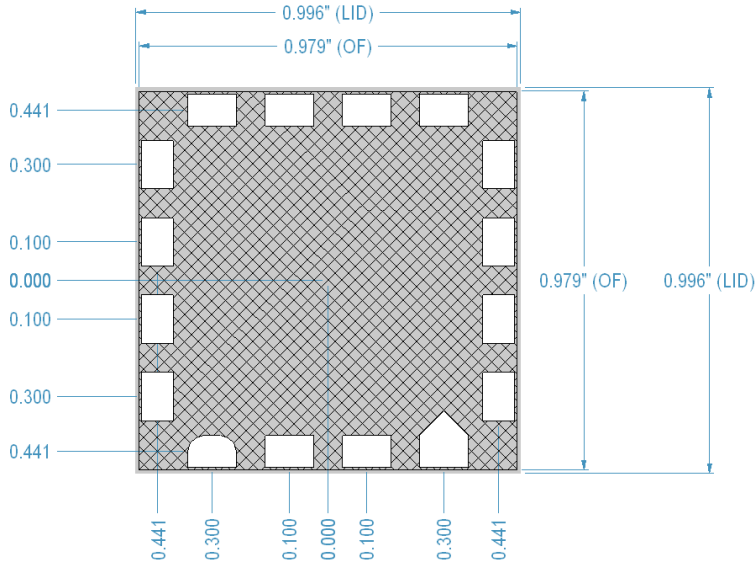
Open-frame Package dimensions, tolerance of ± 0.004 ". Pick and Place from label center.
